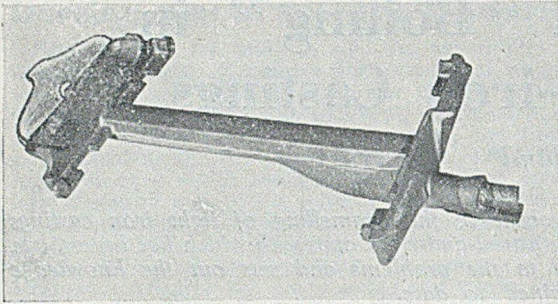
Cooker Burner Casting run from the End (Metal Turbulence was caused).
